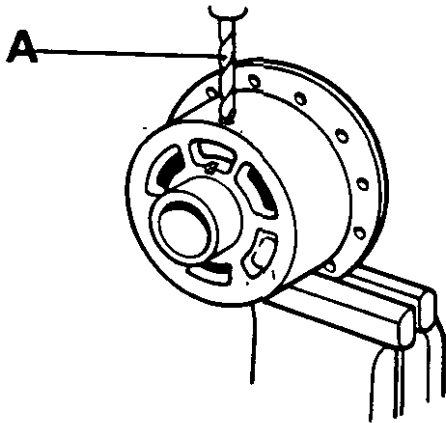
DRILLING OUT DIFFERENTIAL CAGE CAP LOCK PINS
